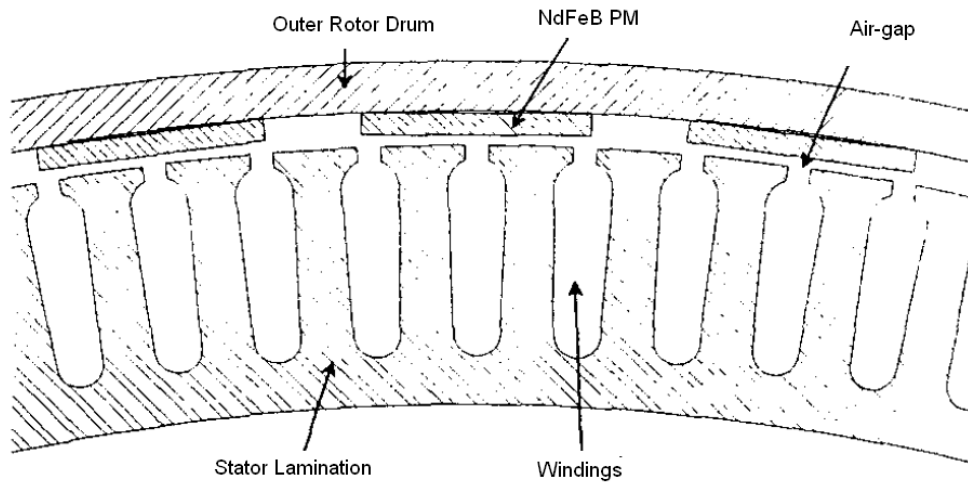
Layout of outer rotor iron-cored surface-mounted RFPM generator with NdFeB permanent magnets on outer rotor drum [130]
